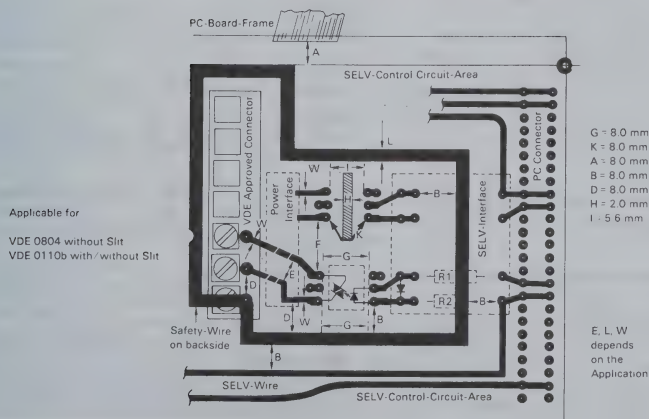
OPTOCOUPLER MOUNTING ON PC BOARD
